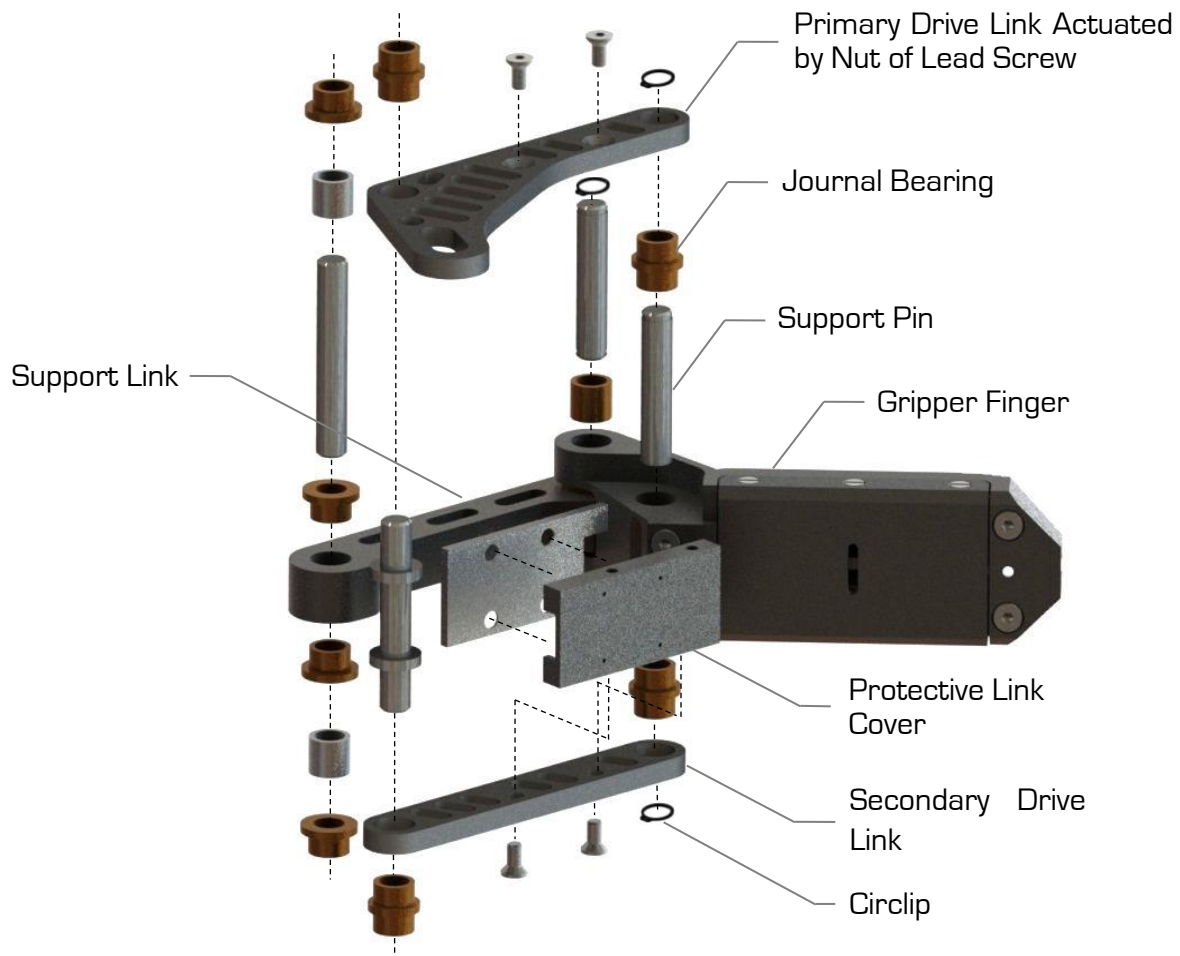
Exploded View of the Four-Bar Parallel Mechanism
